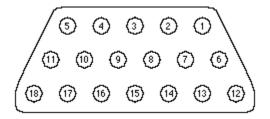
SIR Drawer Power Connector Part Number M83733/2RA018
